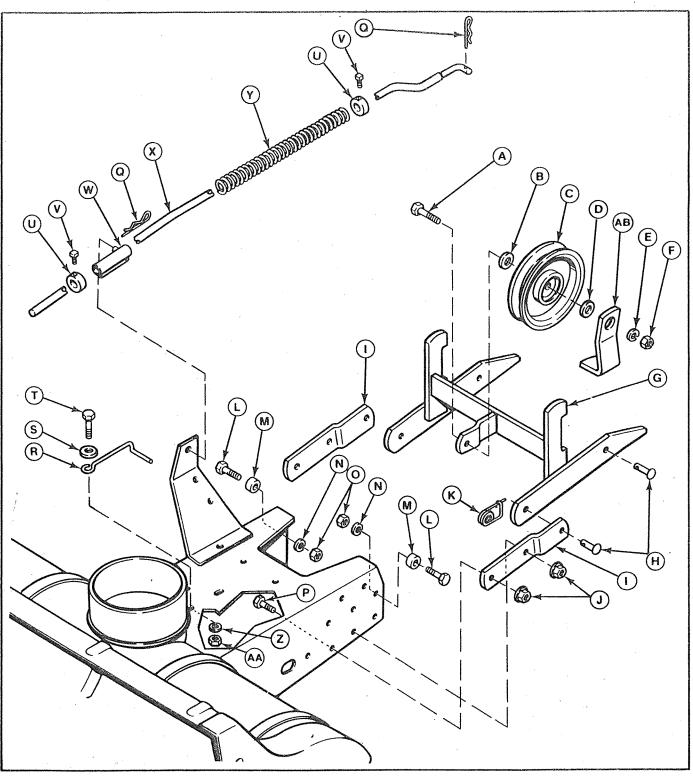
Snowthrower Hitch & Lift Rod Assembly, Exploded View
